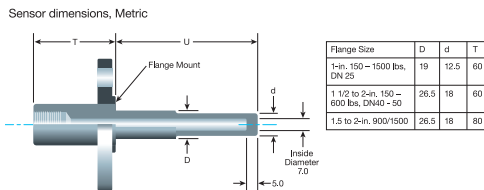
Typical Thermowell Dimensional drawing (Metric)
